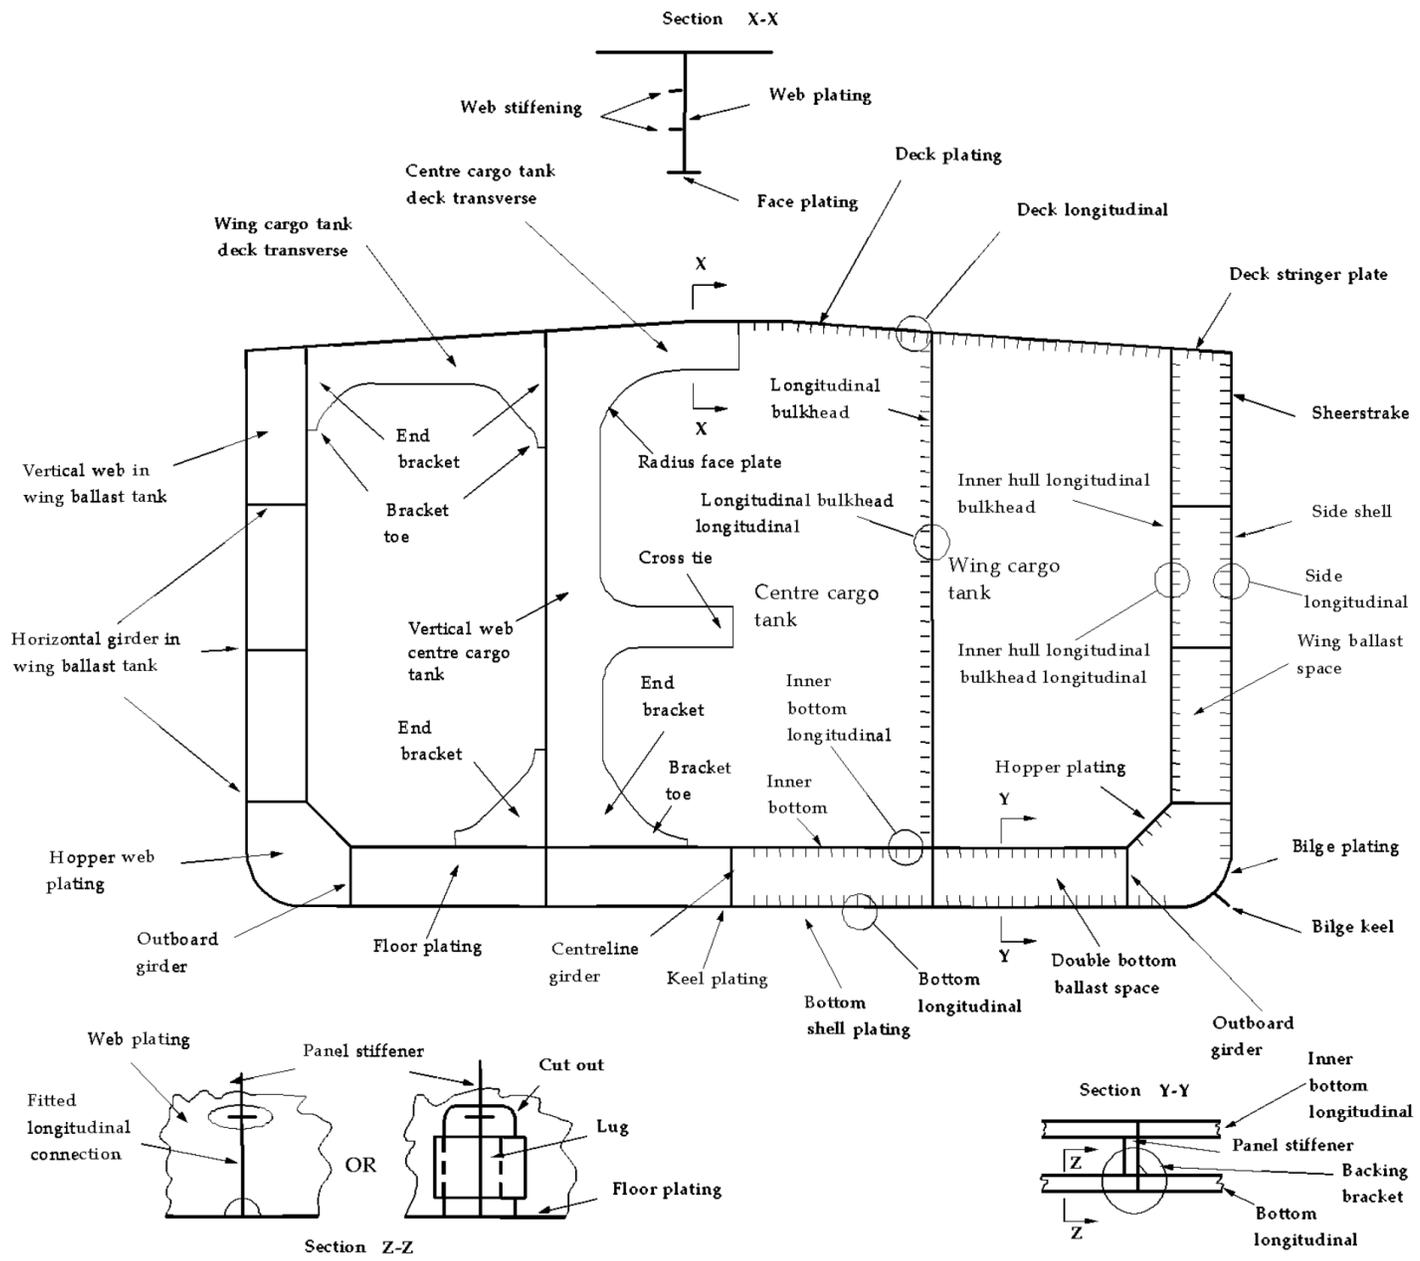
Typical midship section of a double hull oil tanker with two longitudinal bulkheads including nomenclature
